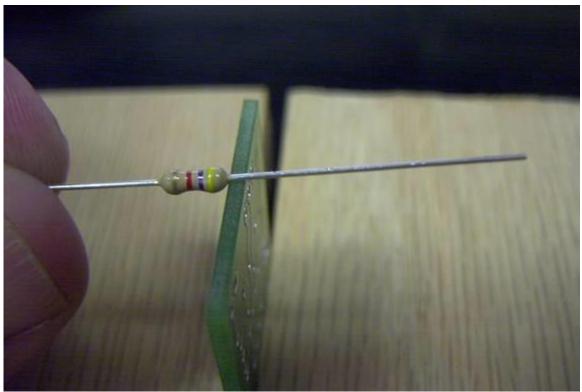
Resistor being held over the edge of the board prior to bending. Note that the edge of the resistor is right against the edge of the board. This is important.
